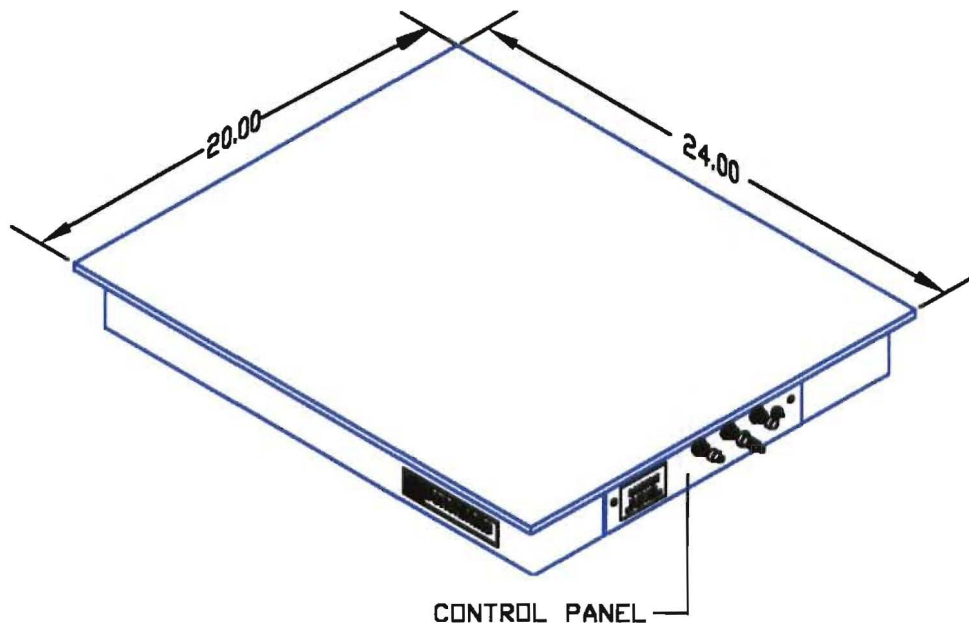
Outline View of 2212 VIBRAPLANE Platform.
